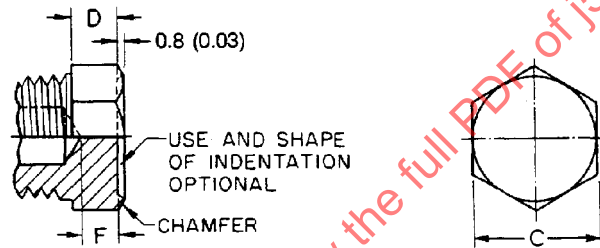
B—HEXAGON OUTSIDE HEAD FILLER AND DRAIN PIPE PLUGS¹ (130109F)
